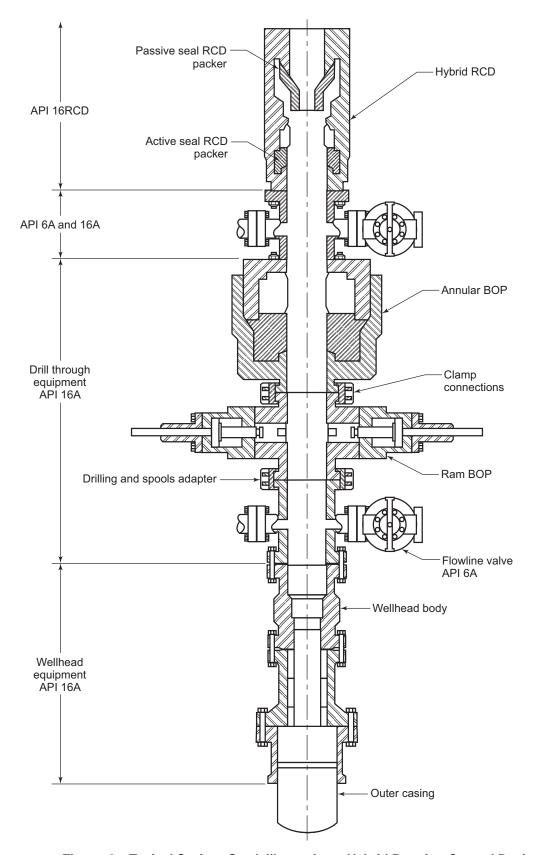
Typical Surface Stack illustrating a Hybrid Rotating Control Device
